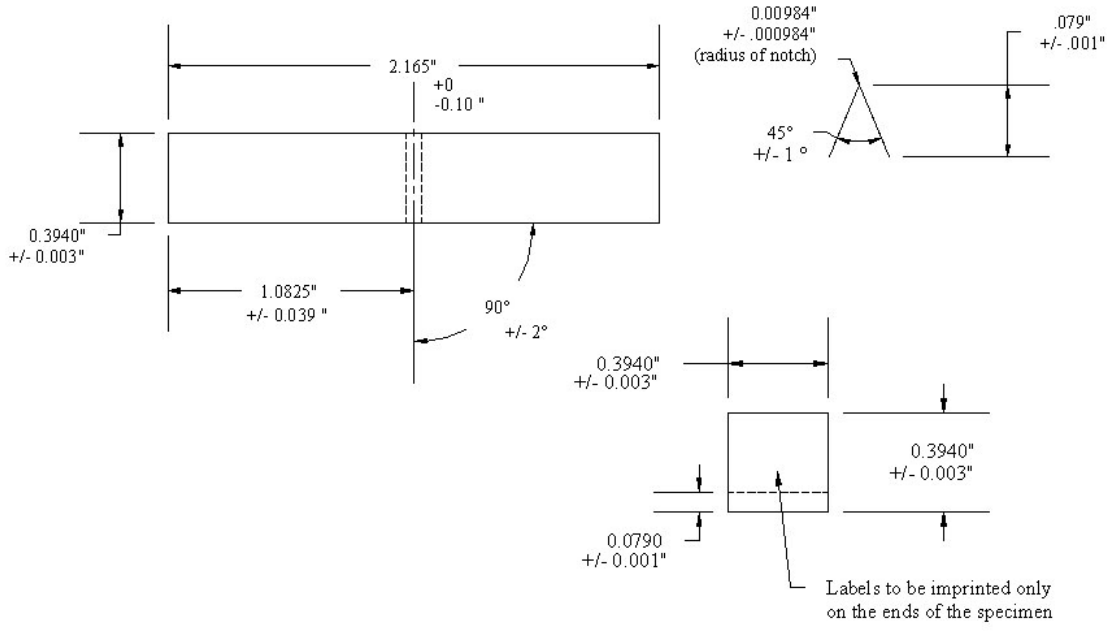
Dimensions of Charpy Specimens per ASTM E23
